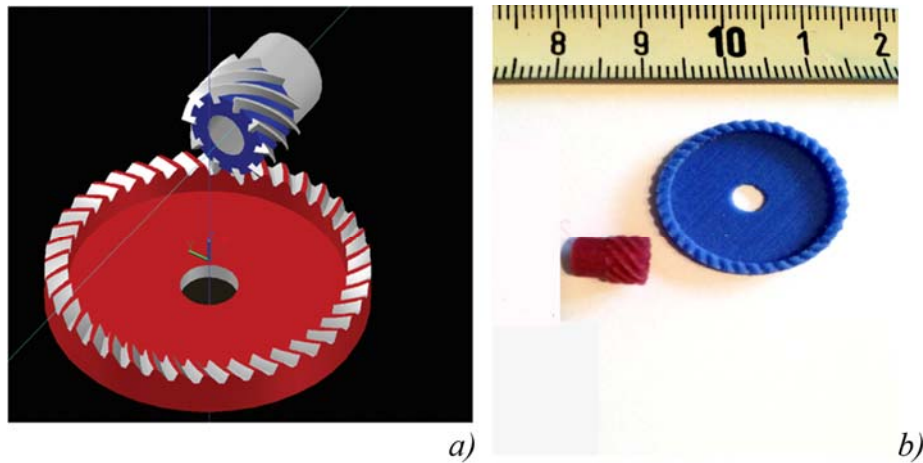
Helicon gear drive with offset 4 mm, gear ratio 40/10 (axial module 0.5 mm): a) 3D CAD model; b) 3D printed model (the shown scale is in mm)
